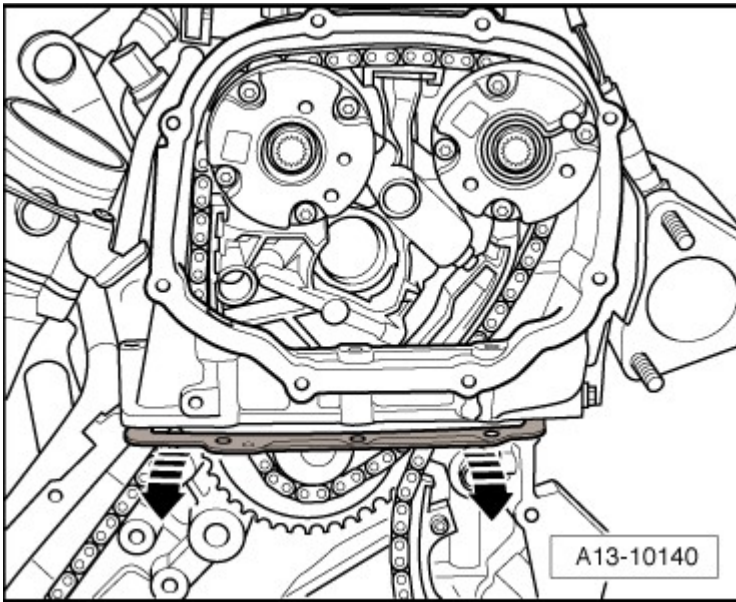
Bending Ends Of Cylinder Head Gaskets Very Slightly Downward
